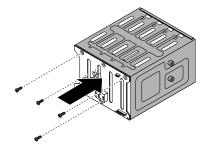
Installing the 3.5-inch hot-swap hard-disk-drive backplane
